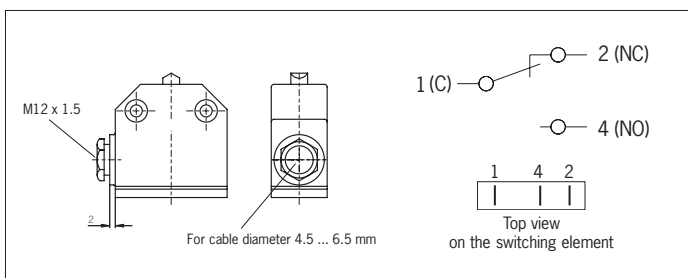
Dimension drawing/connection diagram NO1.550MC2018 with special cable gland
